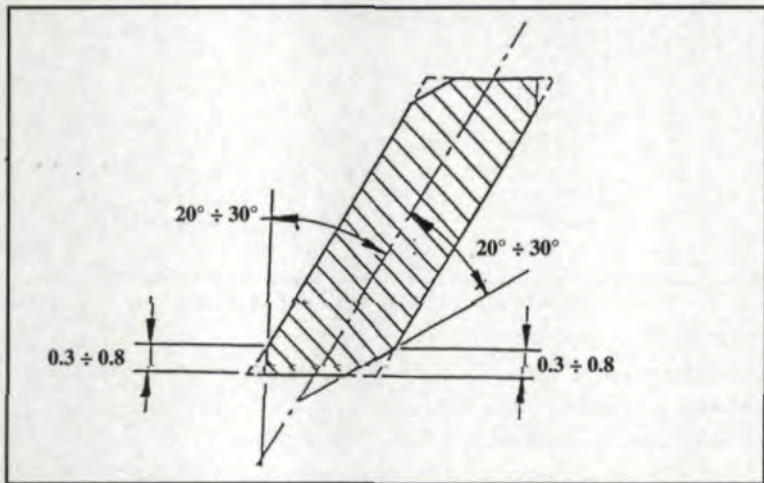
Chamfer angles must be set with exposed points as far away from the ends of the tooth as possible.
